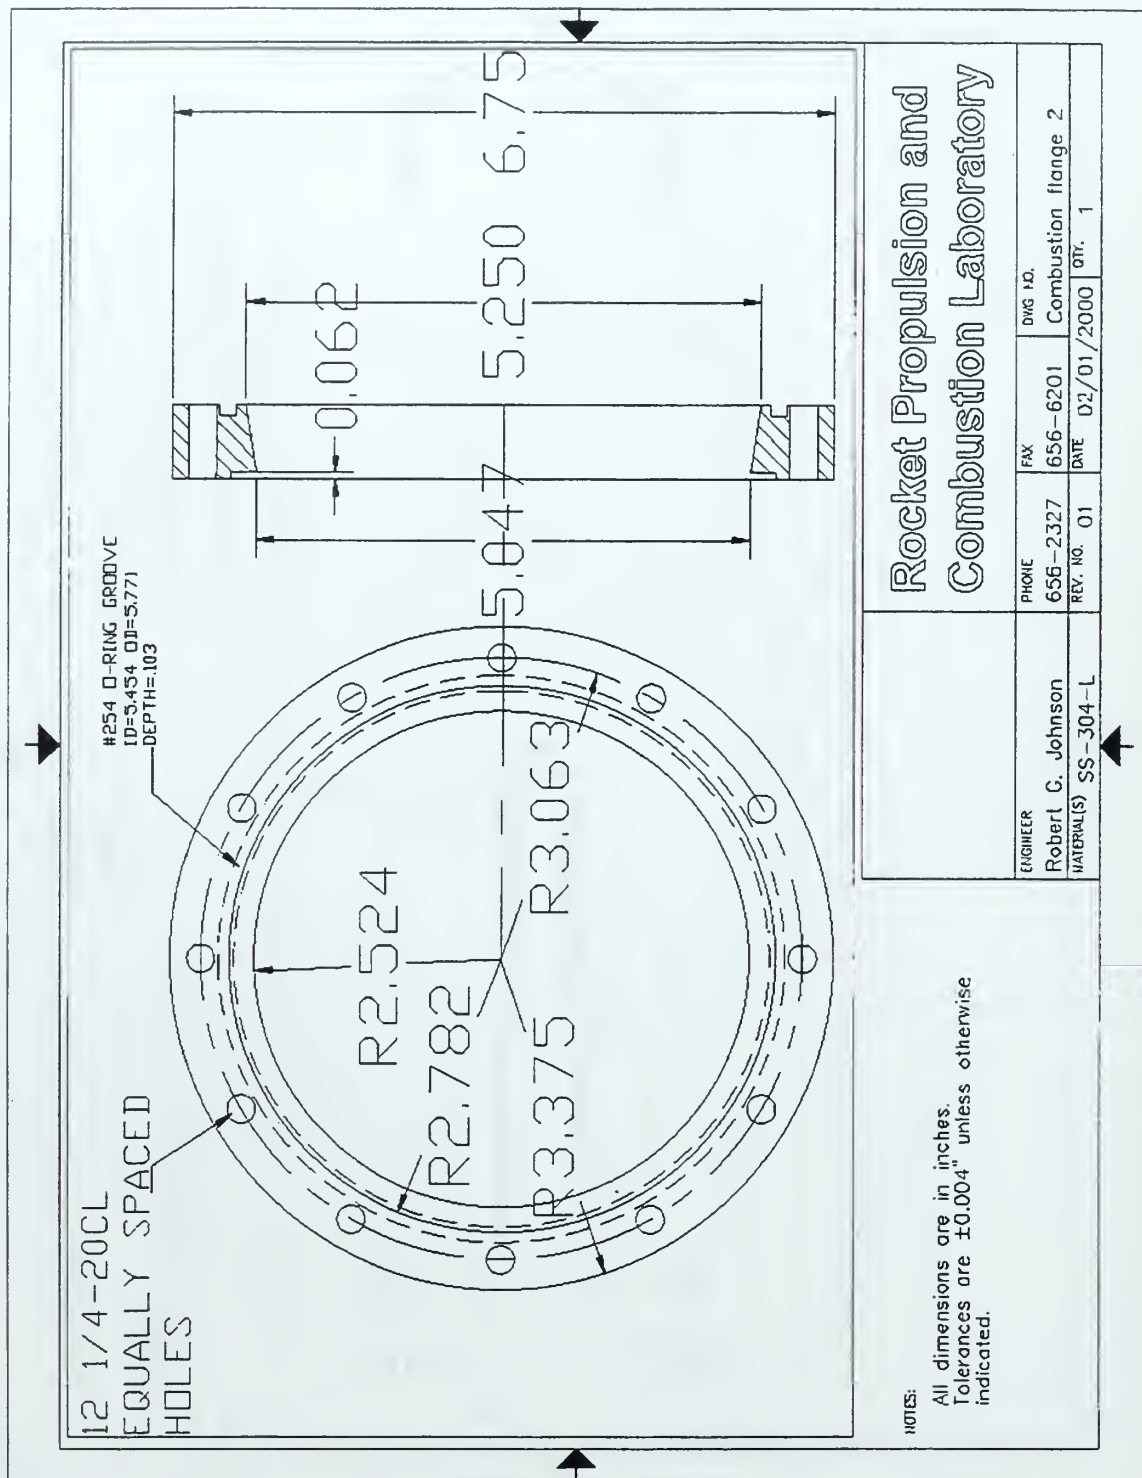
This flange was welded to the inlet of the main combustion tube. The taper inside of the flange was used to match the inner diameter of the tubes through the manifold flange to the inner diameter of the main combustion tube.
